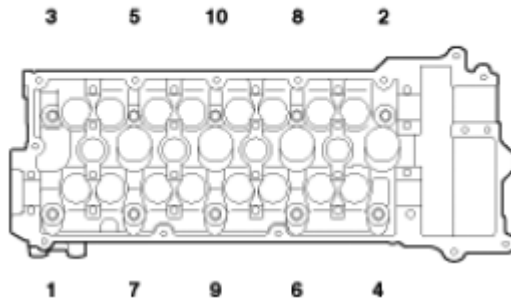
Identifying Cylinder Head Bolts Loosening Sequence
